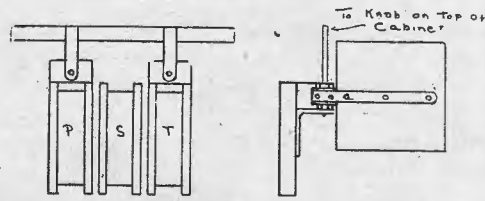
Suggested Method of Mounting Coils for Coupling.
